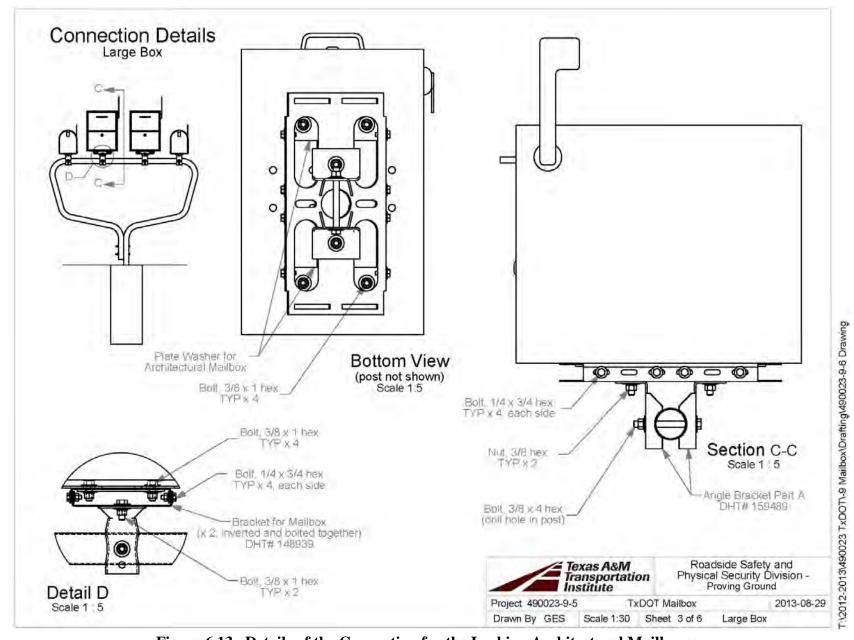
Details of the Connection for the Locking Architectural Mailboxes.
